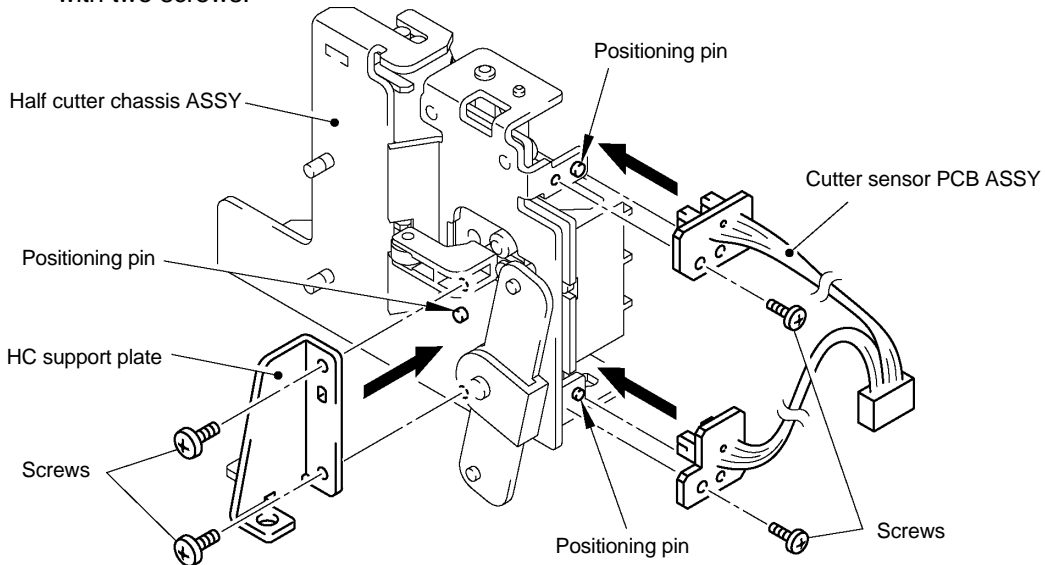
Reassembling the Half Cutter Chassis ASSY (1)
